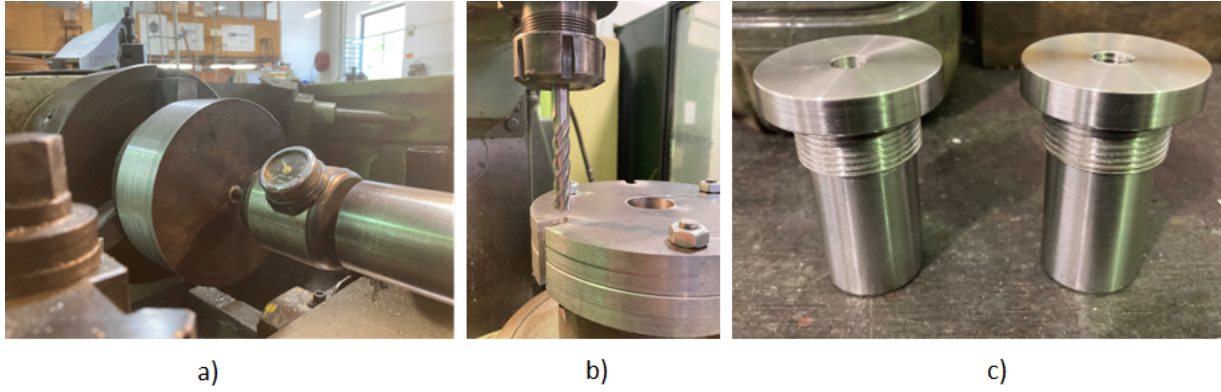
Machining procedures. a) Machining of the discs in the lathe machine. b) Drilling procedure of the tears. c) Link elements.
